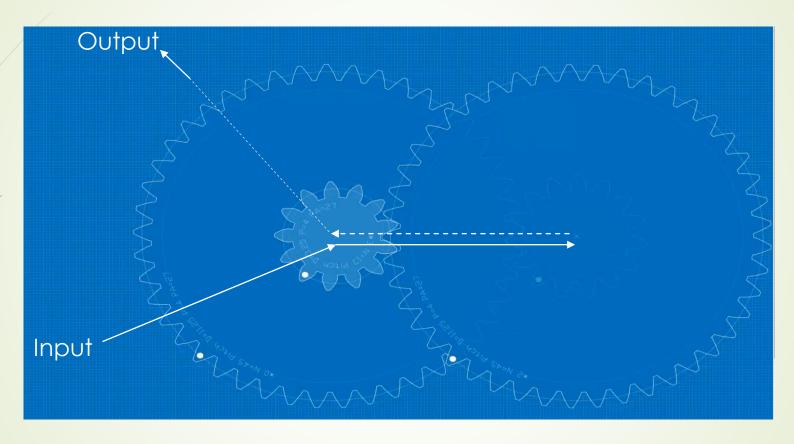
Technical drawing of a speed reducer Source: 'Aplicaciones prácticas de rodamientos', FAG Kugelfischer Georg Schäfer & Co Schweinfurt.
